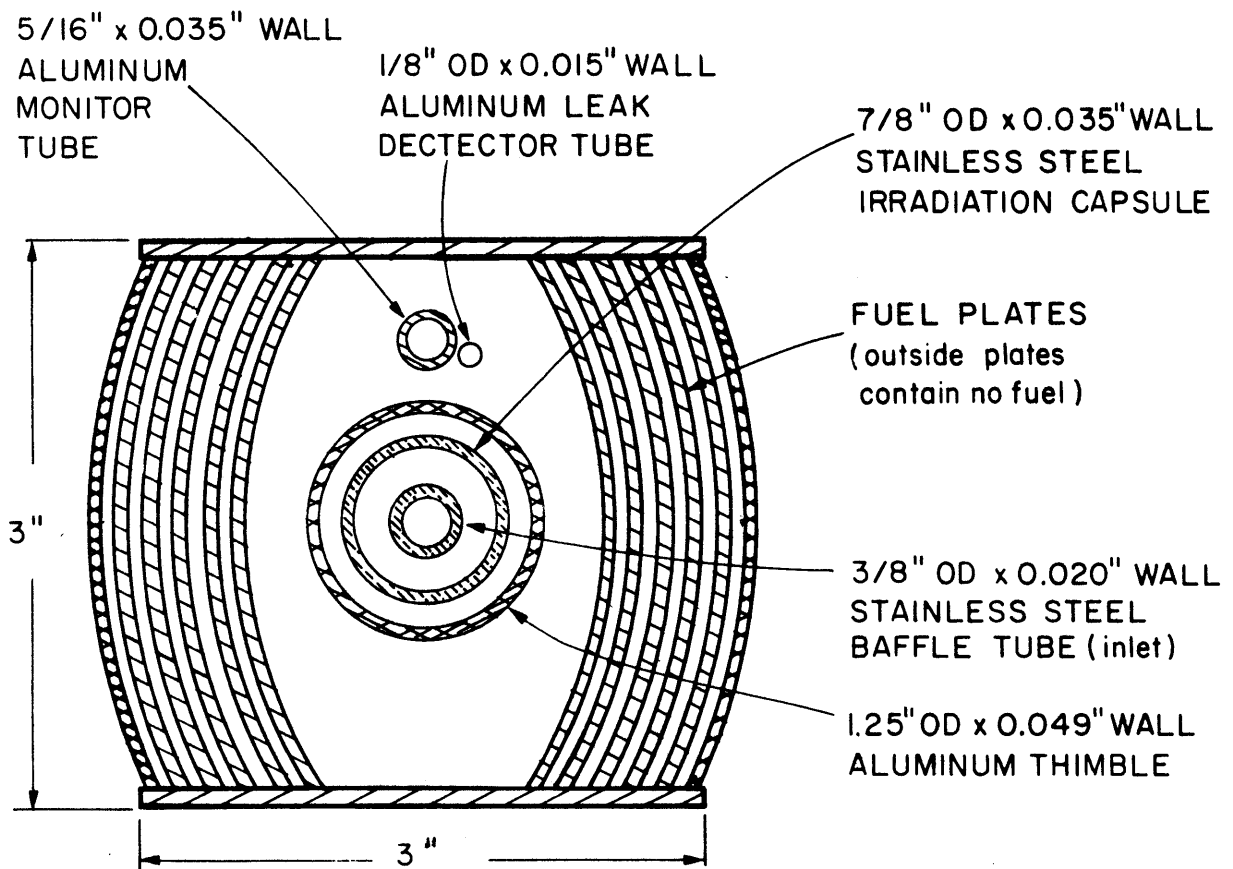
DRAWING OF FUEL ELEMENT CROSS SECTION WITH POSITION OF IN-PILE SECTION SHOWN
